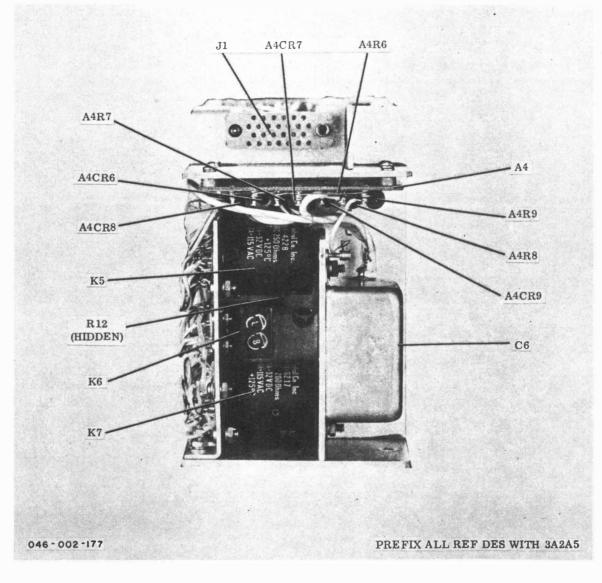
DC-to-DC Converter Assembly 3A2A5 Rear View, Component Location
